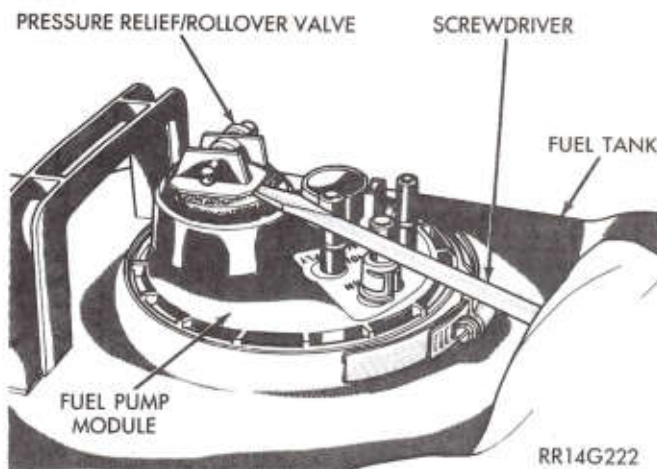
Servicing Pressure Relief/Rollover Valve TBI Engines
